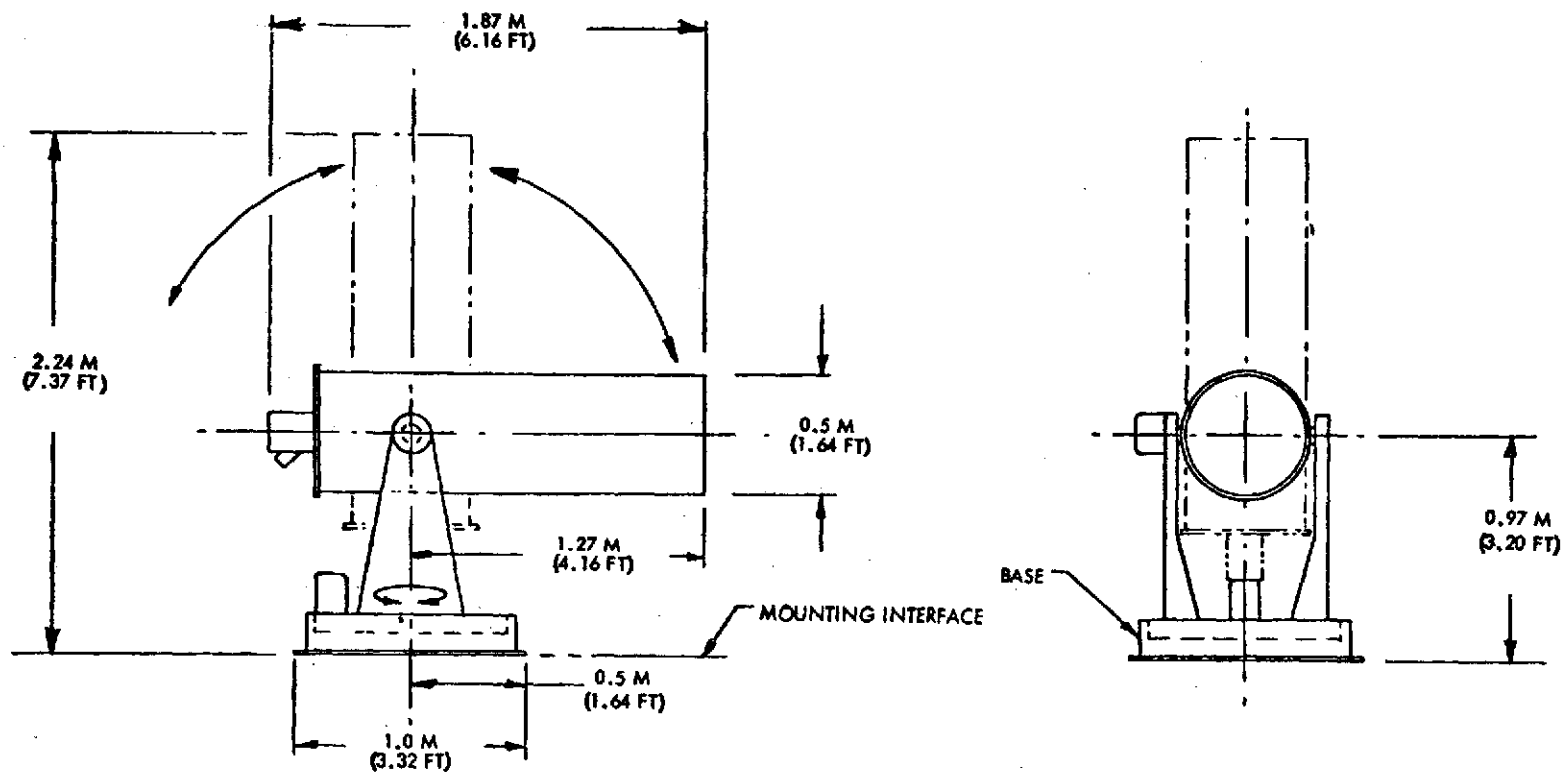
AP200 Laser Radar Equipment Envelope--Payload AP-06-S
